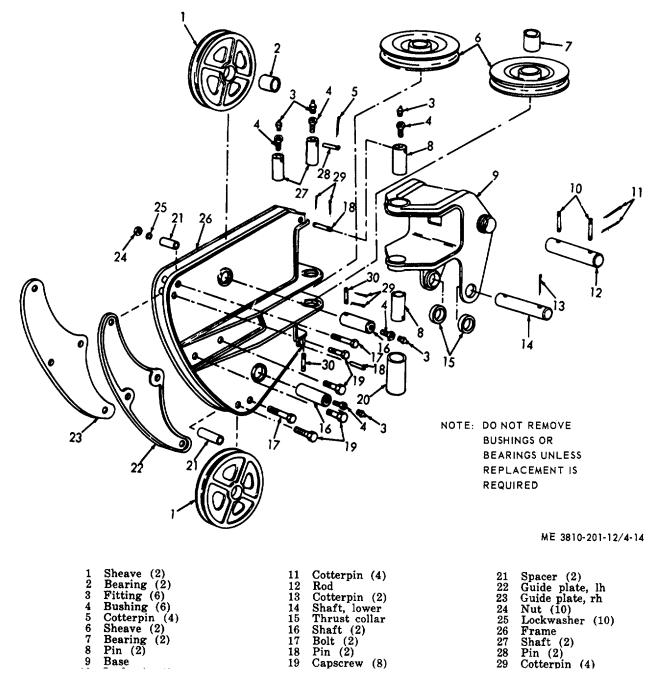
Fair lead and sheaves, disassembly and reassembly.
